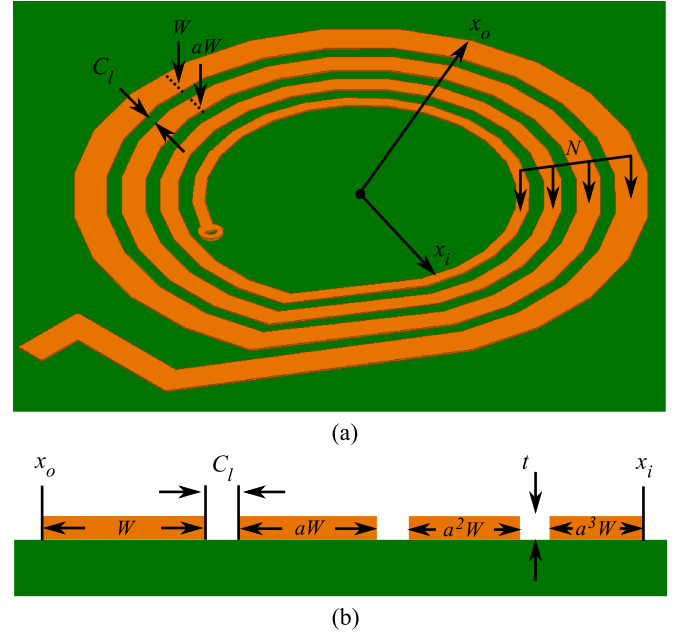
Circular planar spiral winding with TWR applied, indicating the important spiral dimensions (a) isometric view (b) zoomed-in vertical cross section.
